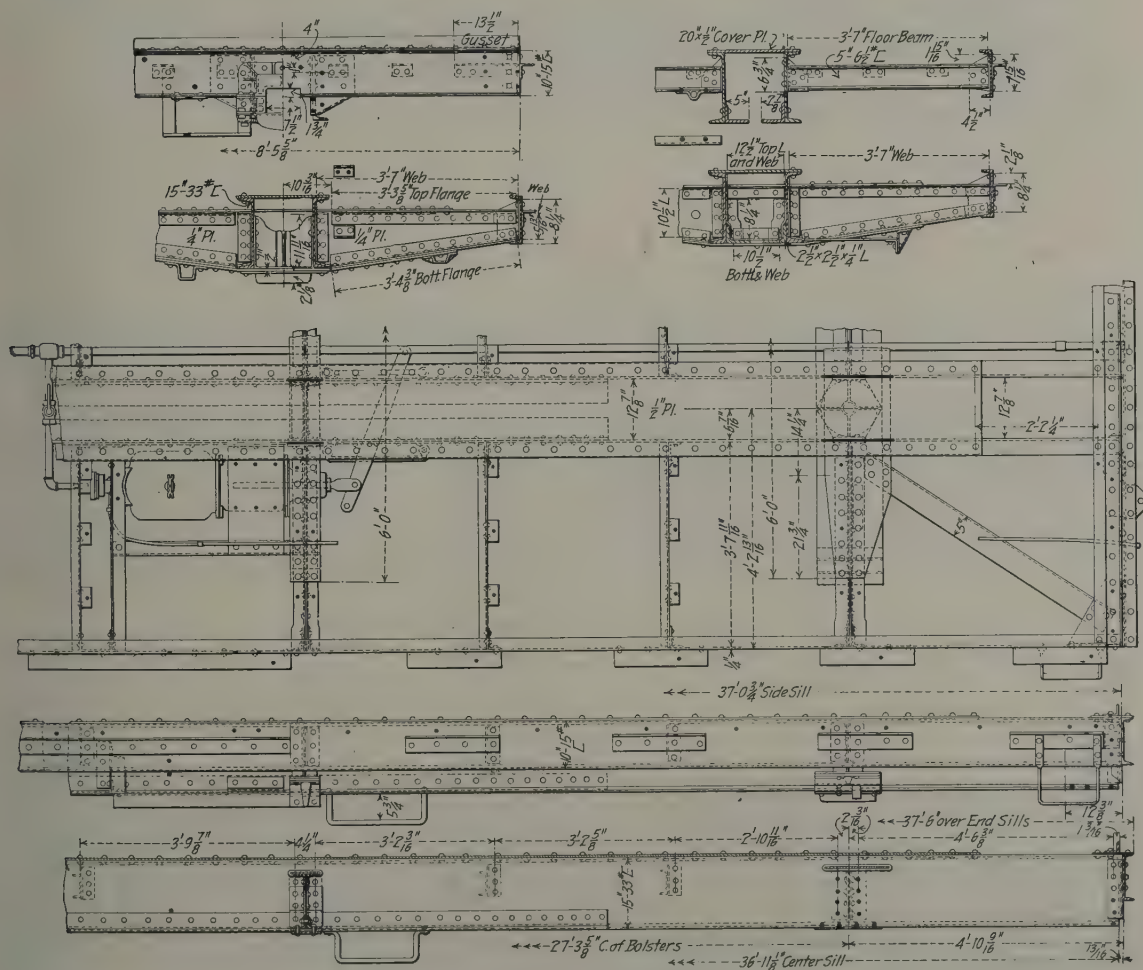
Steel Underframe for Boston & Maine 40-Ton Capacity Box Car. Builder, Western Steel Car & Foundry Company.
